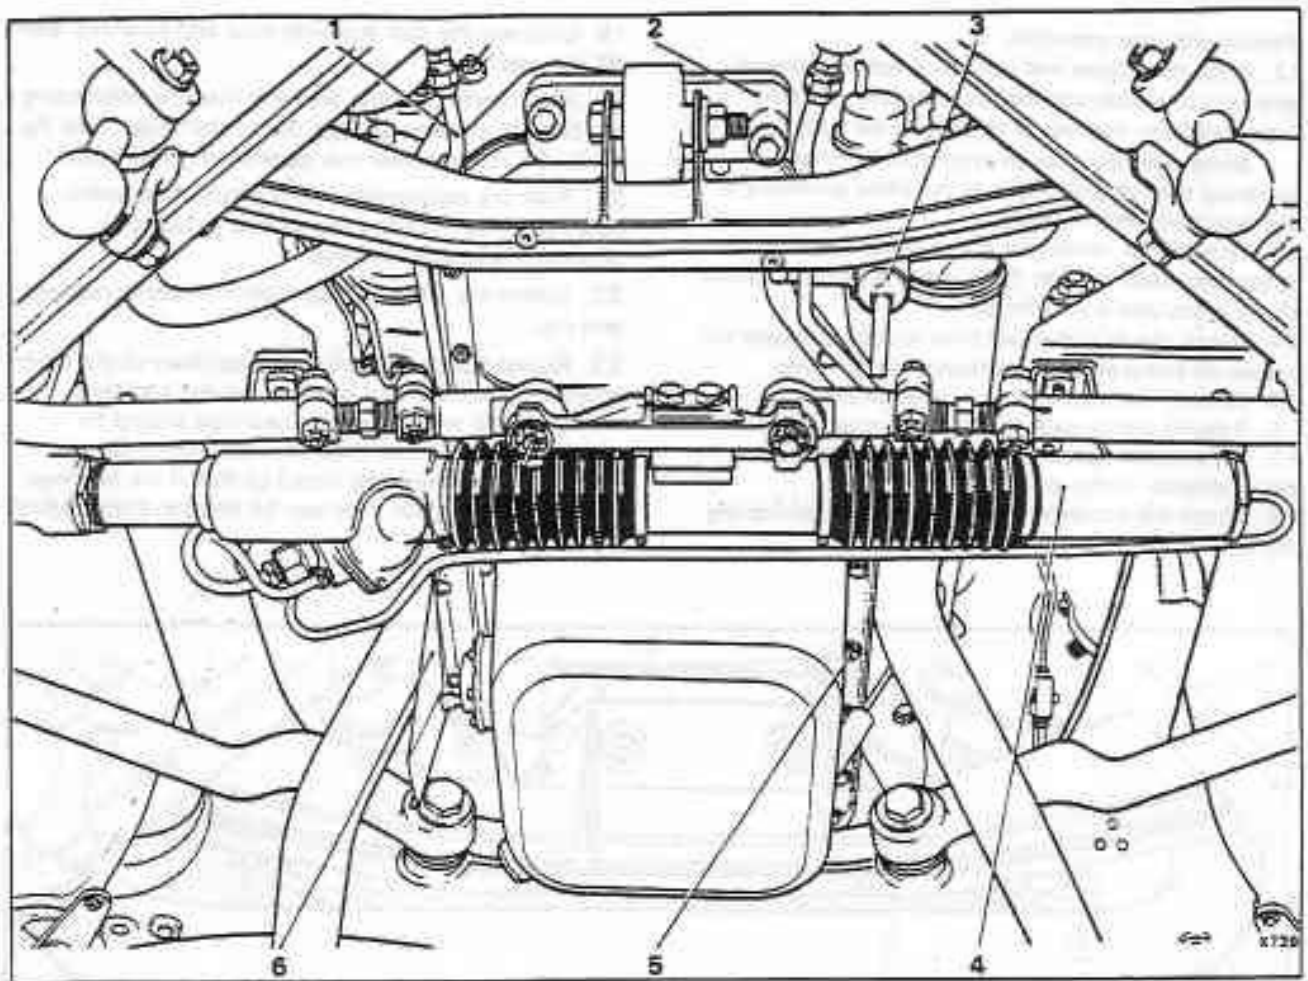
Removing the engine sump (other than turbocharged engines)
